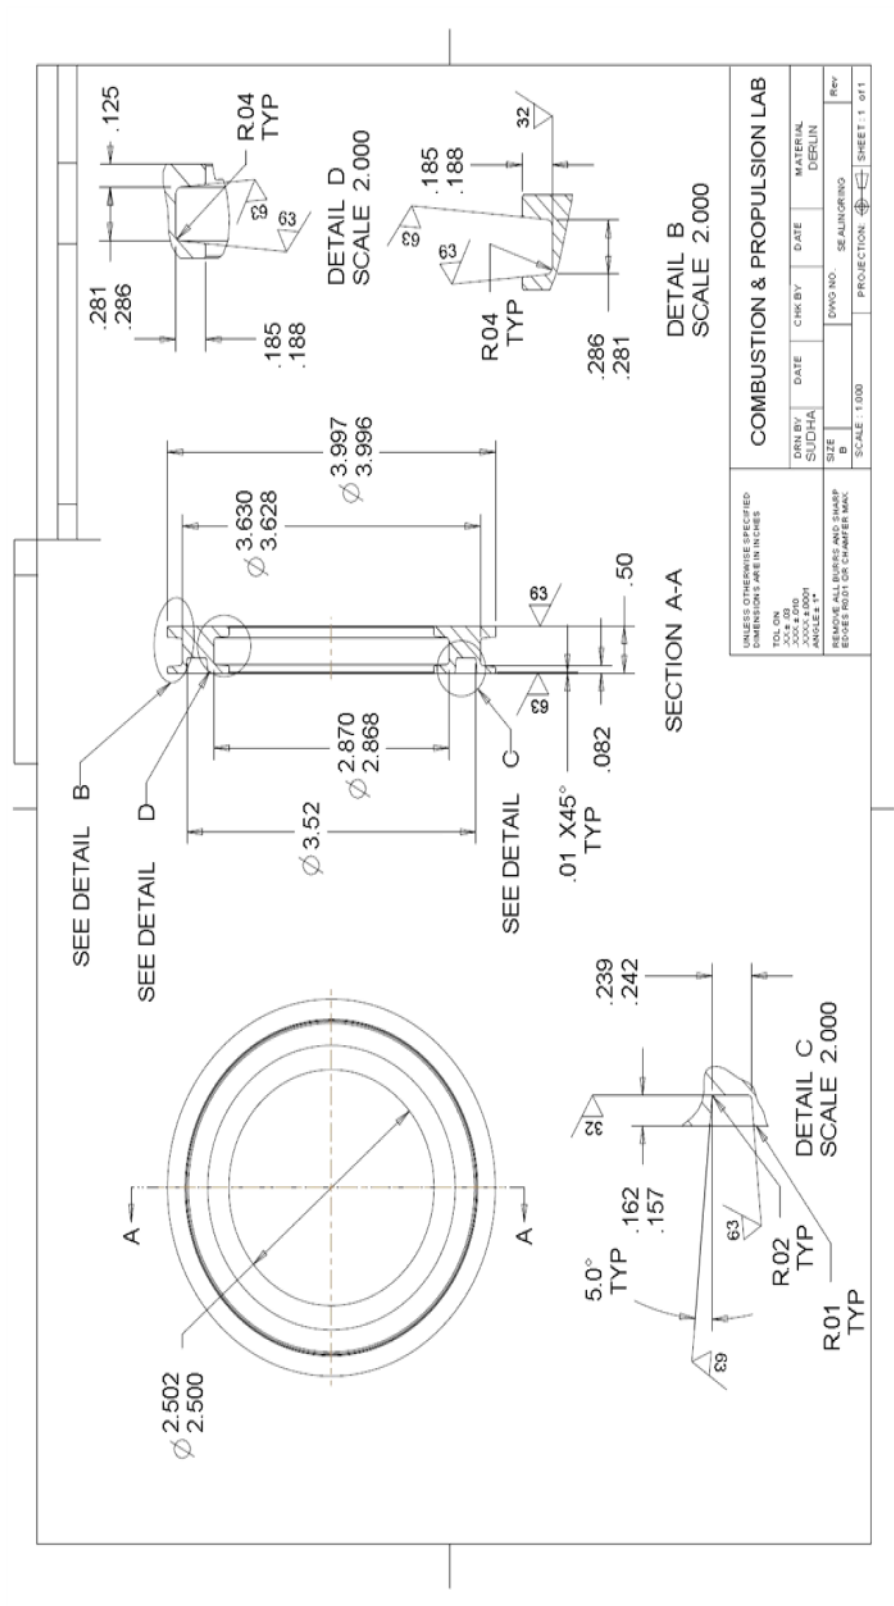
Sealing ring part drawing in the main chamber assembly
